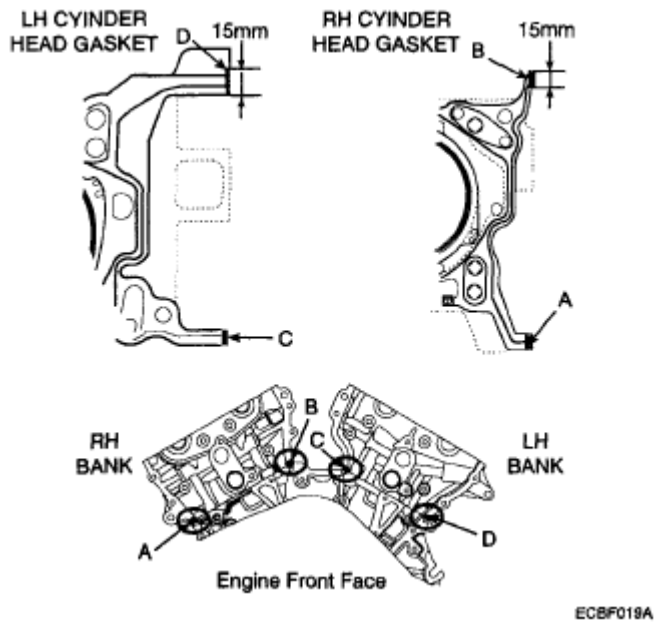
Applying Sealant On Cylinder Head Gaskets After Assembling Cylinder Head Gaskets On Cylinder Block
